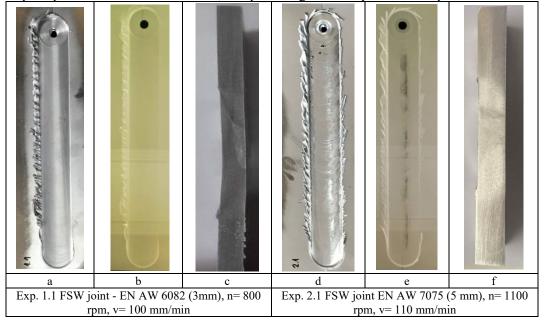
Surface appearance of FSW/SFSW: welded joints of EN AW 6082 (a), X-ray control (b) and macroscopic analysis (c); welded joints of EN AW 7075 (d), X-ray control (e) and macroscopic appearance (f)
